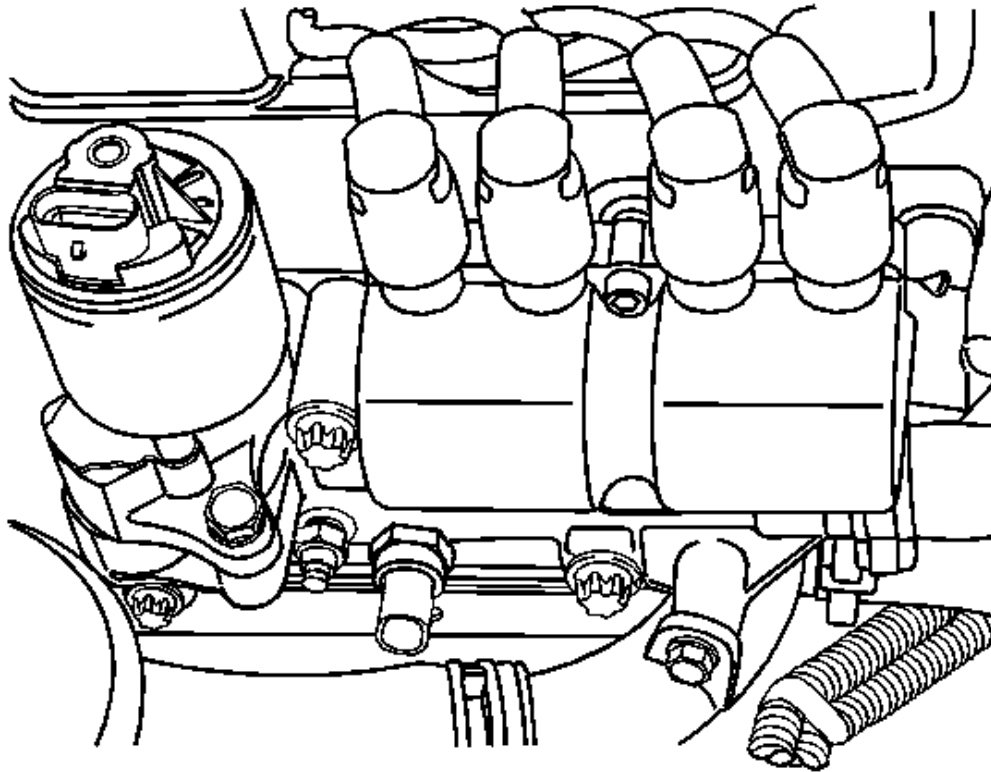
View Of DIS Coil, EGR, Mounting Bracket And Bolts
